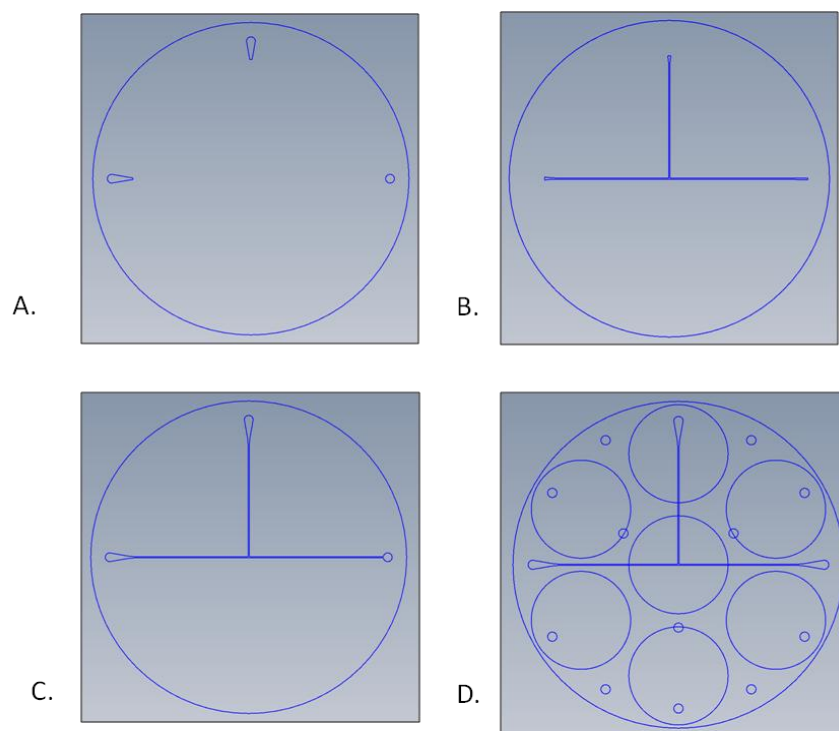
2d, bird's eye view of Solidworks CAD drawing for the design of the micromilled t-junction. A.) Design of inlet and outlet holes. B.) Design of channels. C.) Channels and holes integrated. D.) Appearance of complete drawing for micromilled t-junction. The formation of the holes in the brass manifold is shown in picture D, demonstrating ideal placement for the viewing of droplet formation at the t-junction. Channel width: 200  $\mu\text{m}$ ; channel depth 200  $\mu\text{m}$ .
